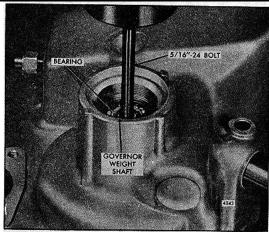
Removing Governor Weight Shaft Assembly from Governor Housing
